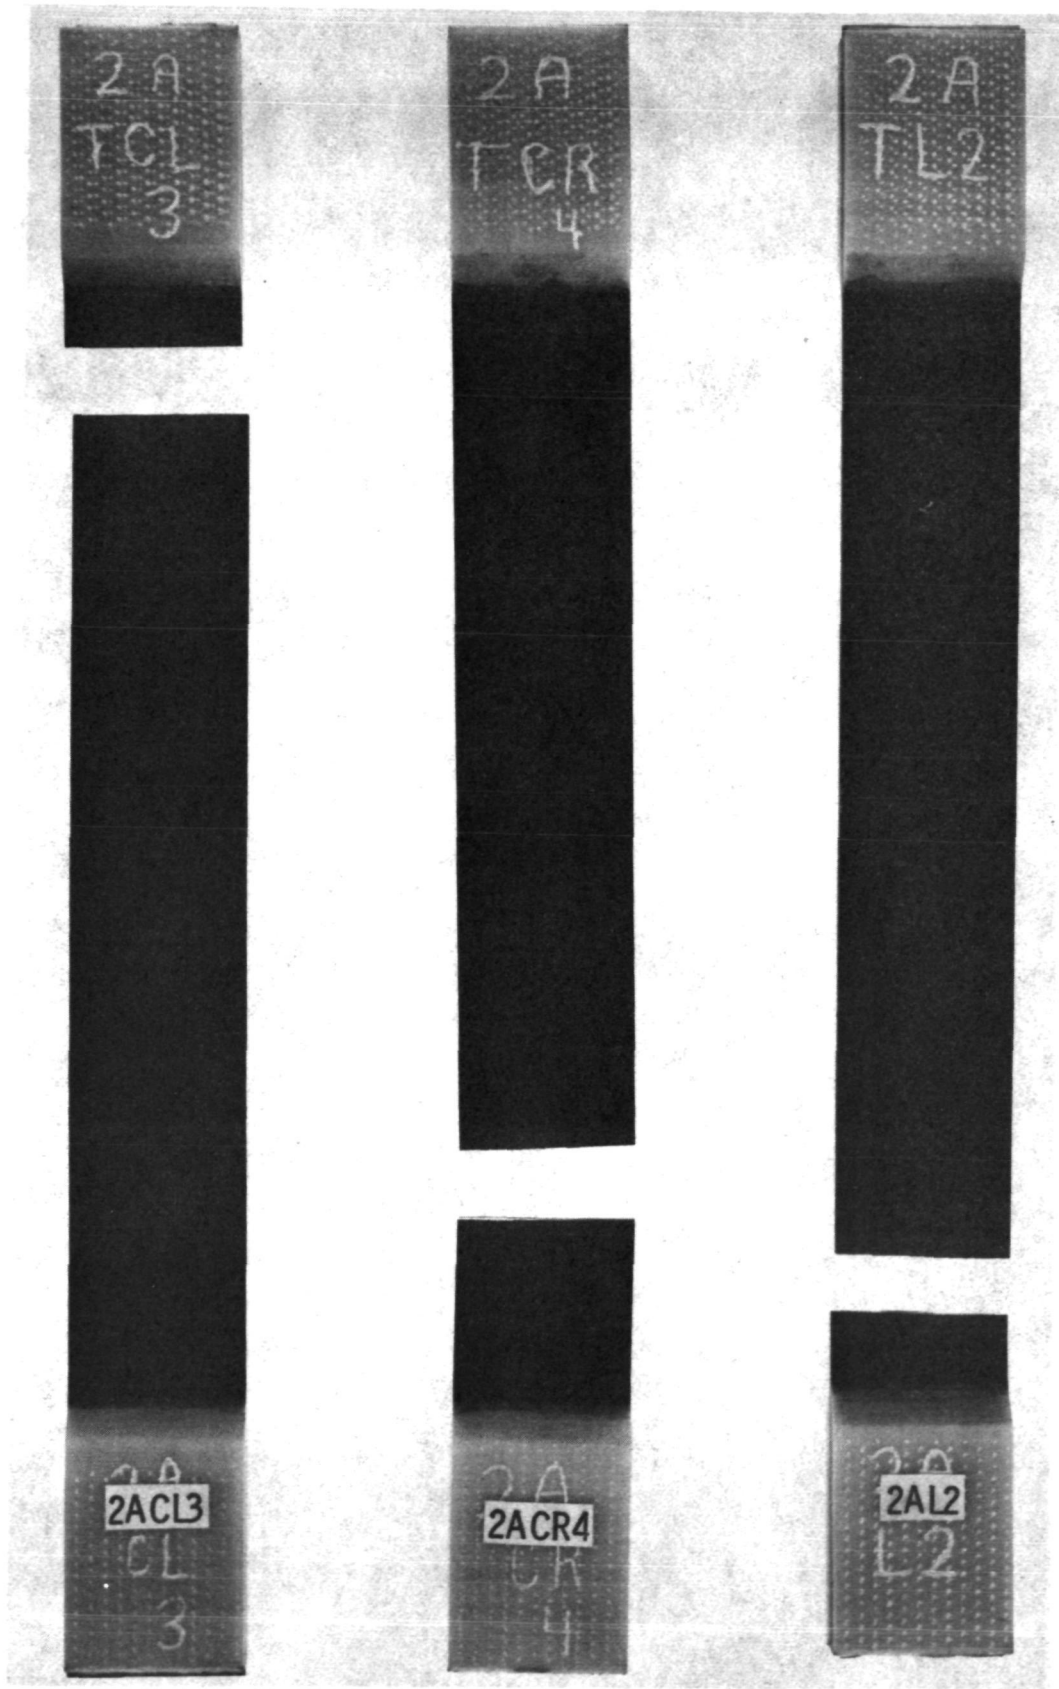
Typical Failures of [90] Boron/Epoxy Laminates Subjected to Longitudinal Tension/Tension Fatigue Loading
